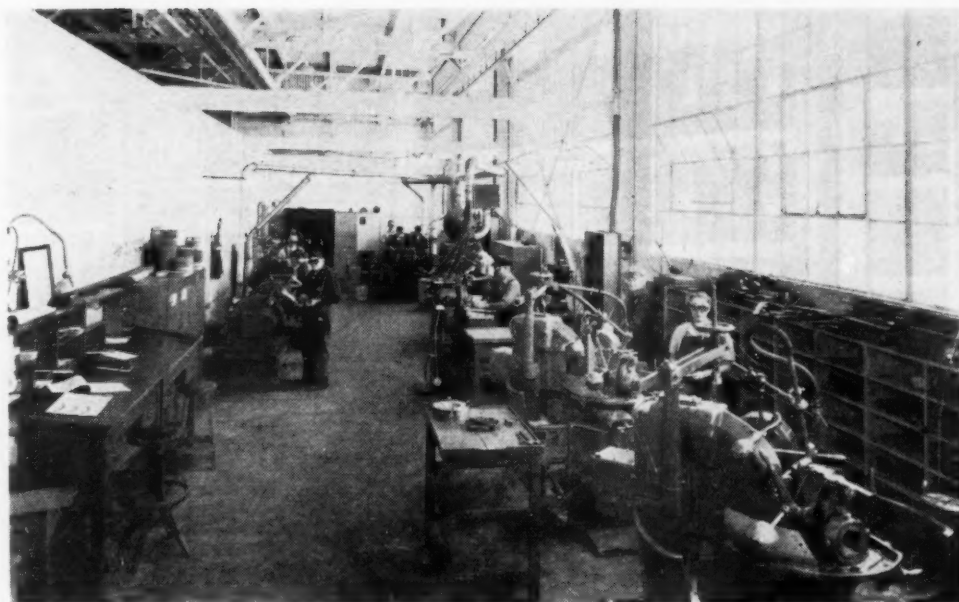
VIEW OF SINGLE-POINT-TOOL GRINDING ROOM SHOWING WHERE ALL CARBIDE LATHE AND PLANER TOOLS ARE RECONDITIONED
